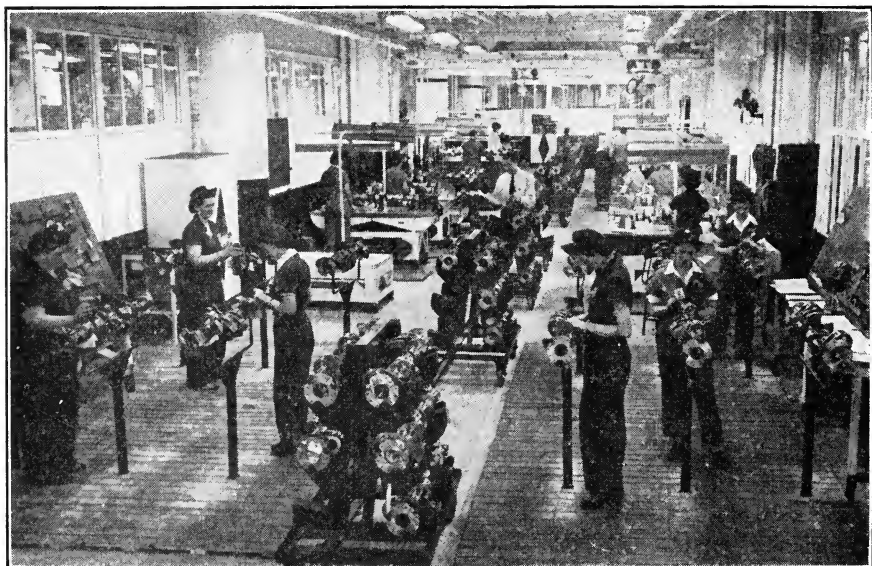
Inspection line for crankshafts. Note the float on racks between work areas. Racks travel on wheels guided by one U-channel. (*Courtesy of Society of Automotive Engineers.*)
